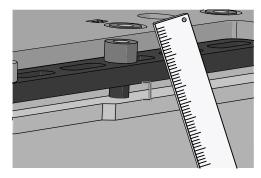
The 3/64 inch gap between the actuator bracket and the seat plate.
